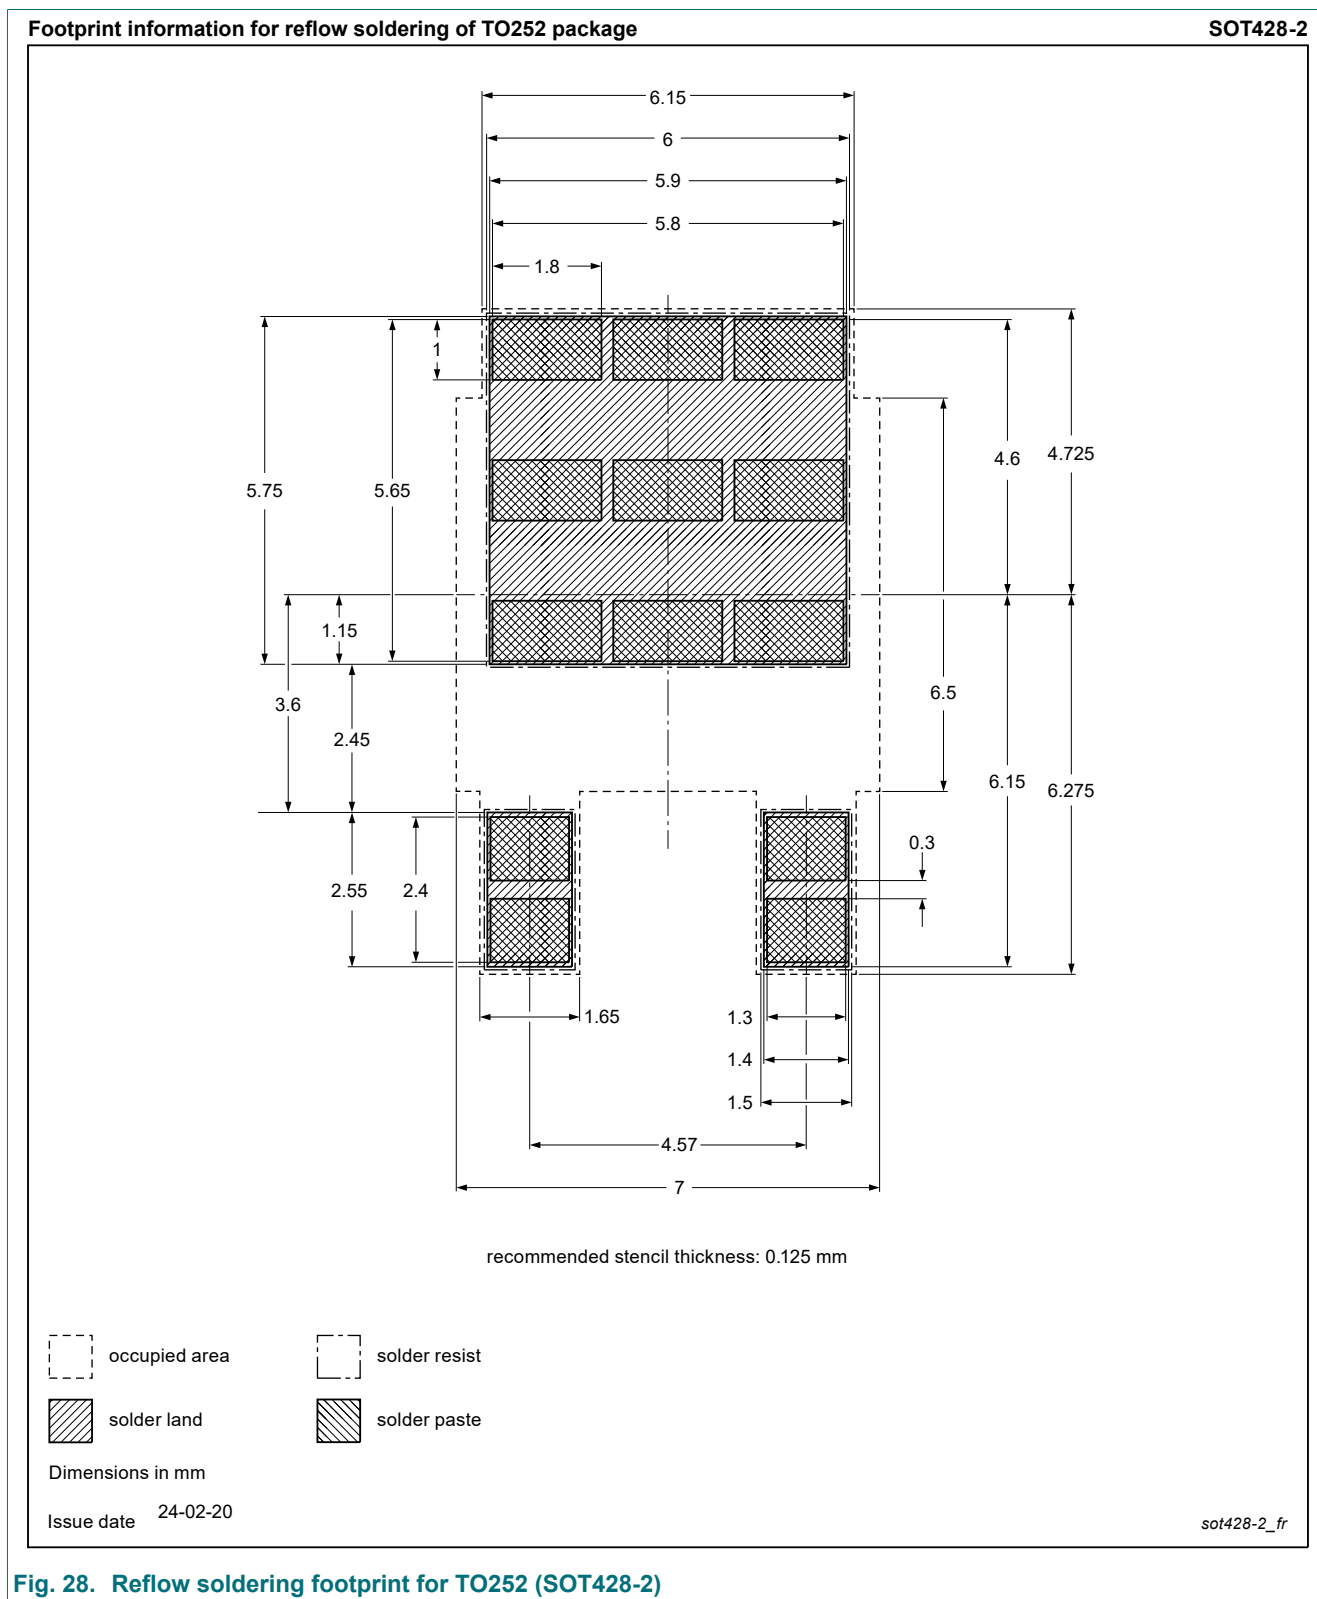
Reflow soldering footprint for TO252 (SOT428-2)
